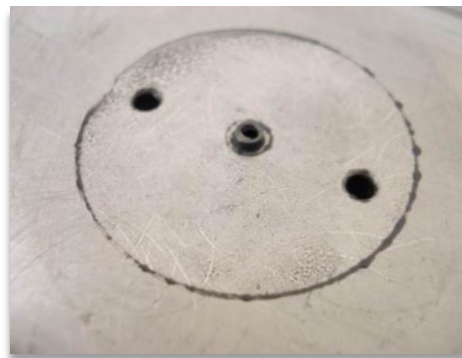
View After Unmounting the Device. A Bead Remains While Mounting Area Appears Almost Clean
